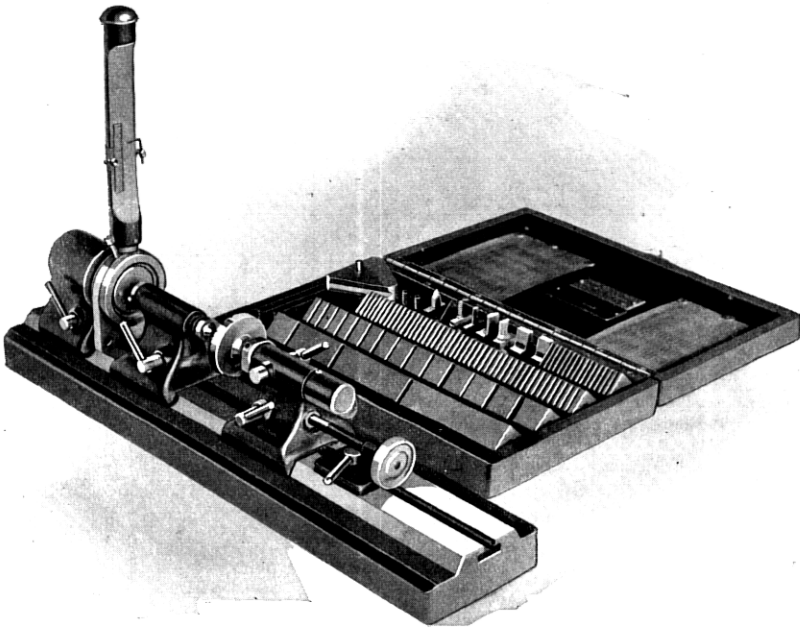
Precision measuring instrument with fluid gage and "Hoke" gage block set.
